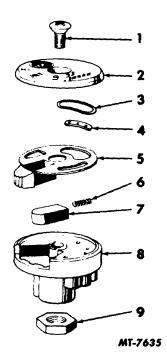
Air Shift Control Valve (Exploded View - Type B).
